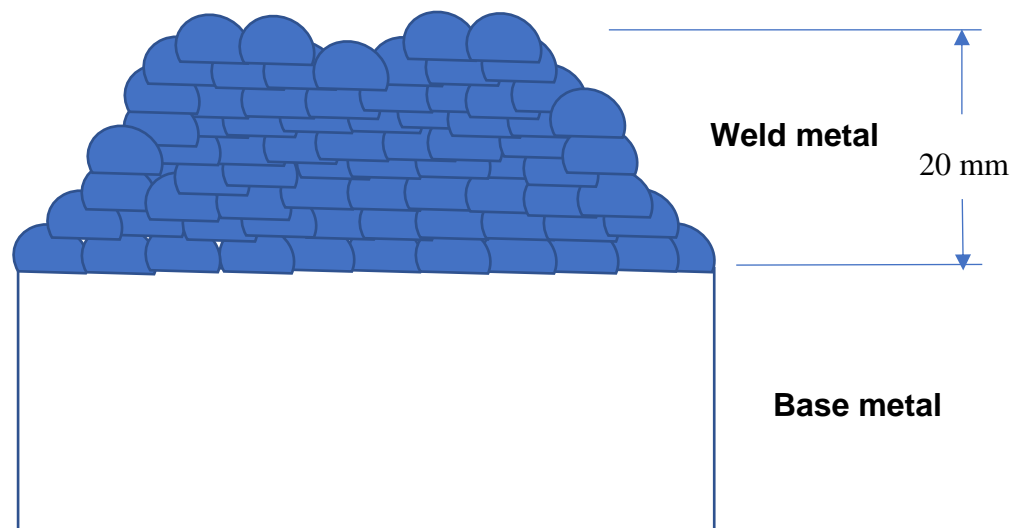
Weld metal pad for chemical analysis [47].
